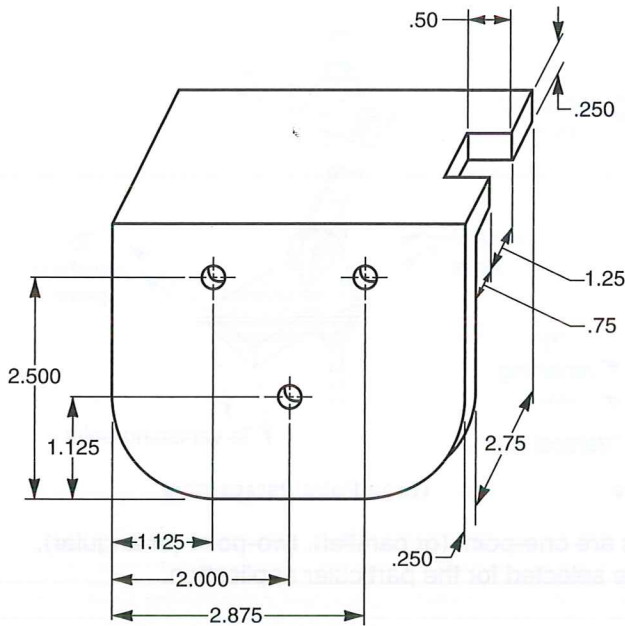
Dimensions on oblique drawings must be in the correct plane for the feature dimensioned.
